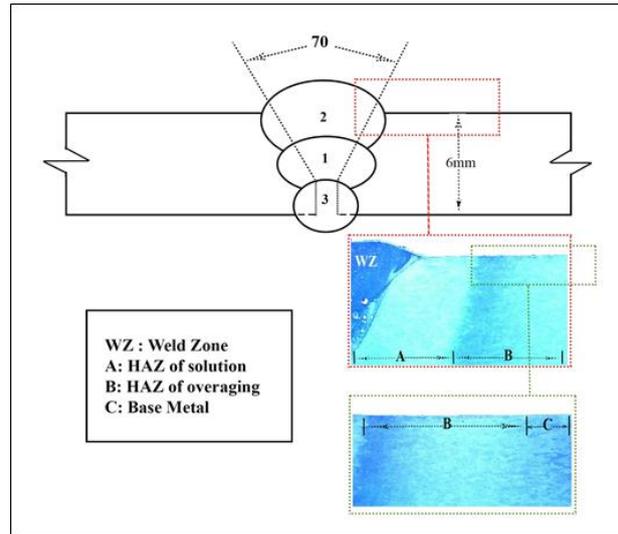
Schematic of fabrication and macrostructure of as-weld sample of this work; HAZ, WZ and Base Metal.
